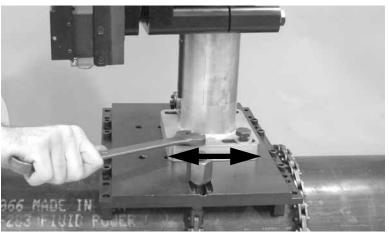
Loosen the bolts in the mounting plate to move the drill forward or back on the saddle.
